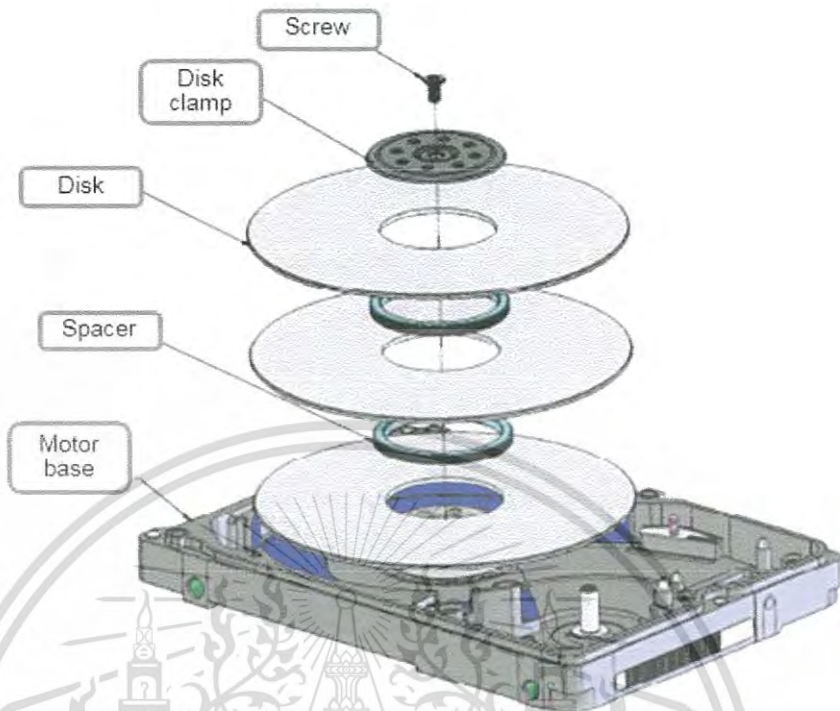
Disks pack assembly in a hard disk drive [1]
